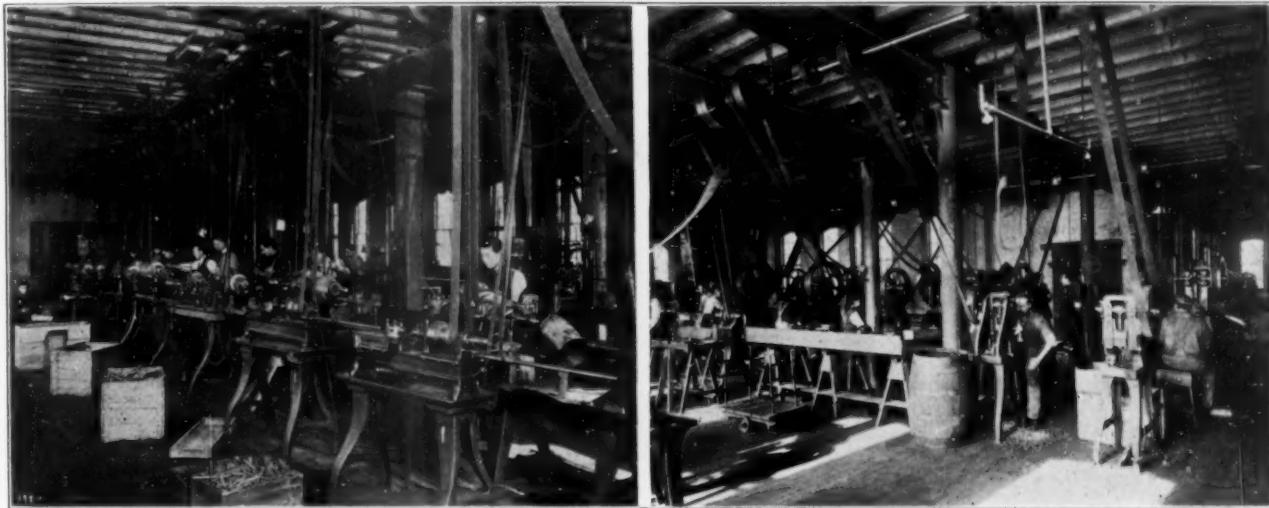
VIEW OF AUTOMATIC SCREW MACHINE ROOM.
